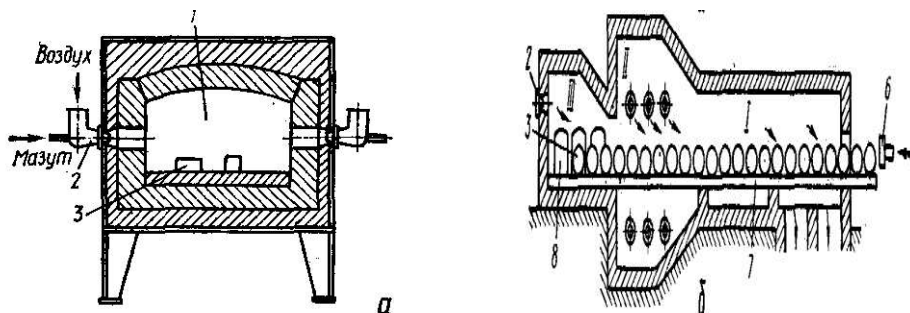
Heating furnaces: a) Chamber furnace b) Methodical furnace
